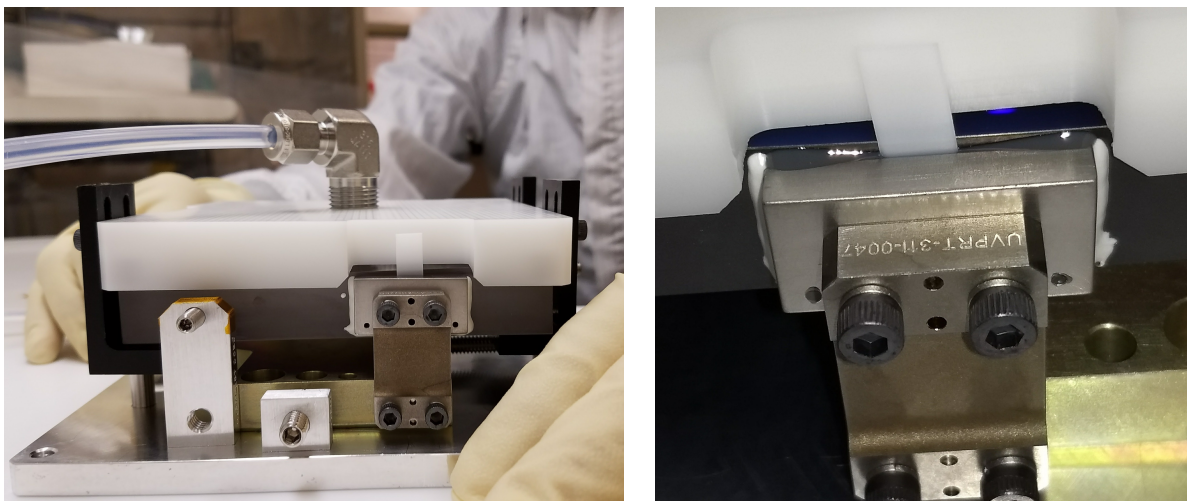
Left: The grating with damming epoxy in place and cured, and the remaining central divider strip still in place, ready for 2216 structural epoxy injection. Right: A grating flexure after 2216 injection, prior to removal of the central Teflon strip.
